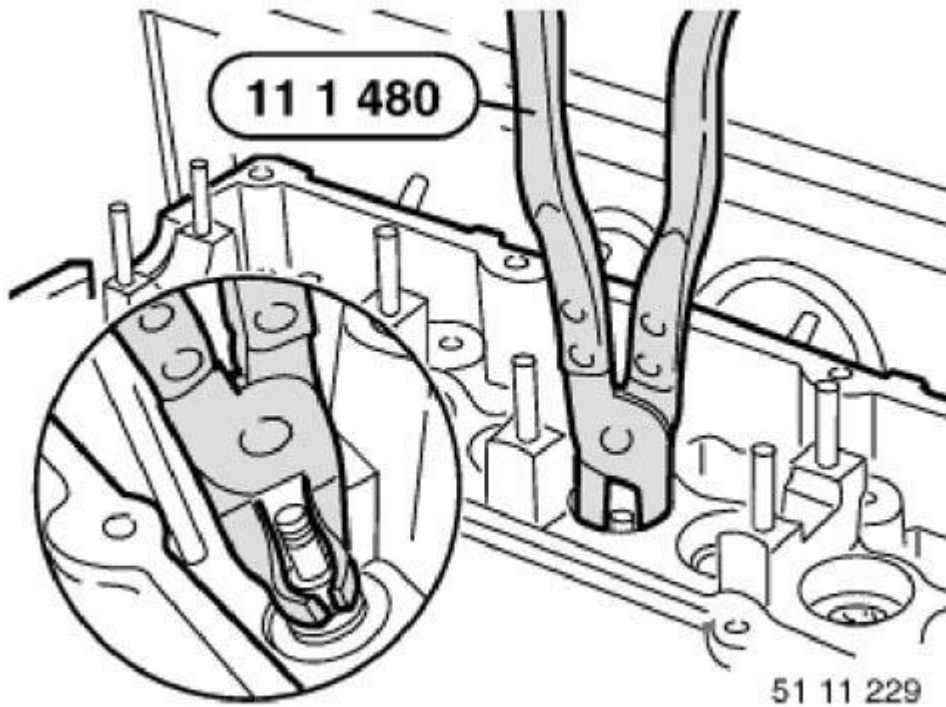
Pressing Special Tool 11 1 480 Onto Valve Stem Seals
